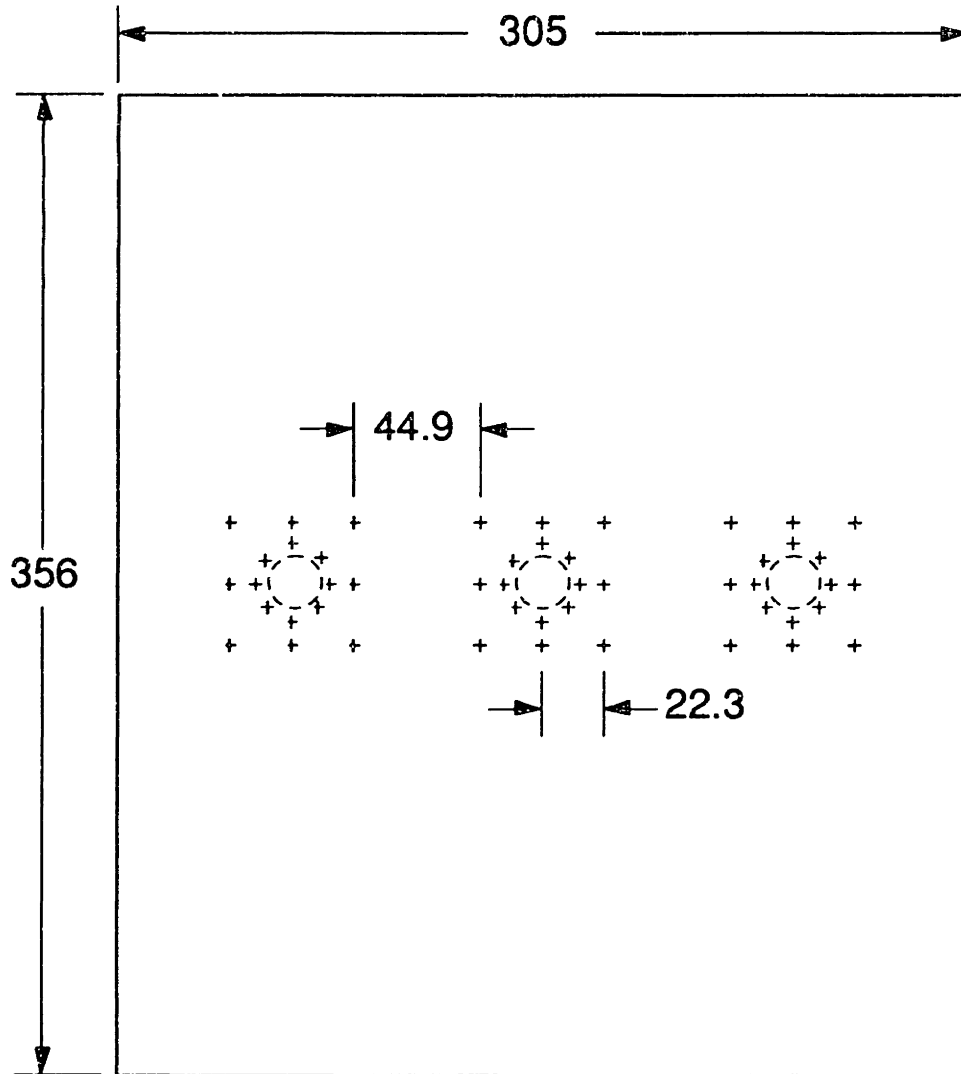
Illustration of mold for manufacturing special cure plates used in manufacture of SCD3 specimens.
